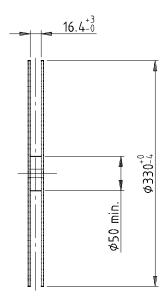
Issue: 4; 12.06.13
